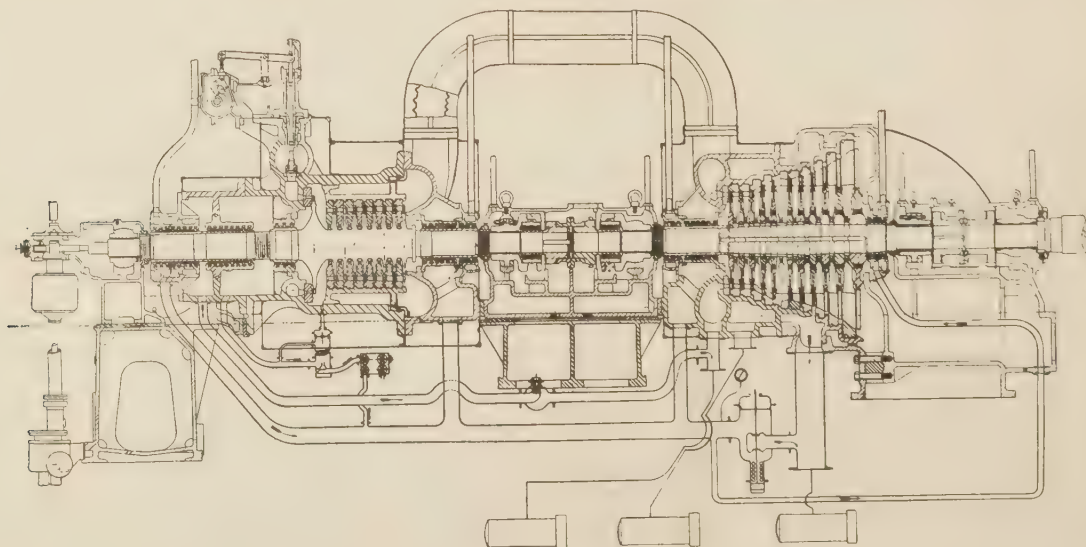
SECTIONAL VIEW OF THE 1000-F TURBINE
